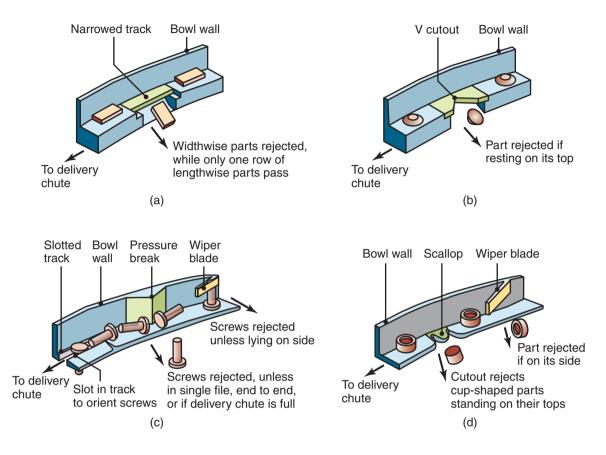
Examples of guides to ensure that parts are properly oriented for automated assembly. *Source:* After G. Boothroyd.
